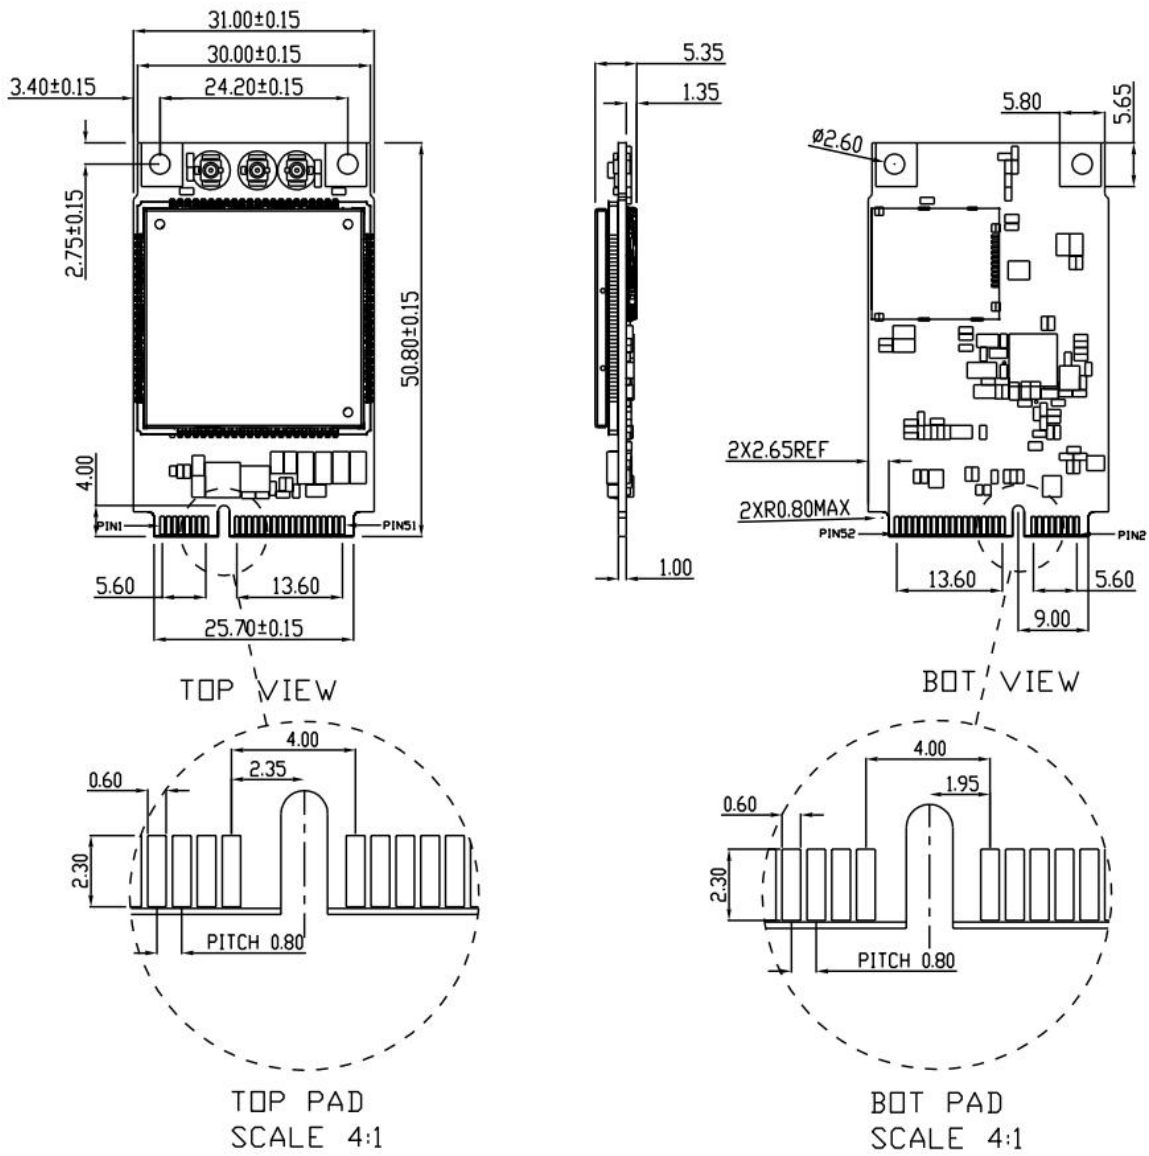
Dimensions of SIM7600 Series-PCIE with SIM holder
